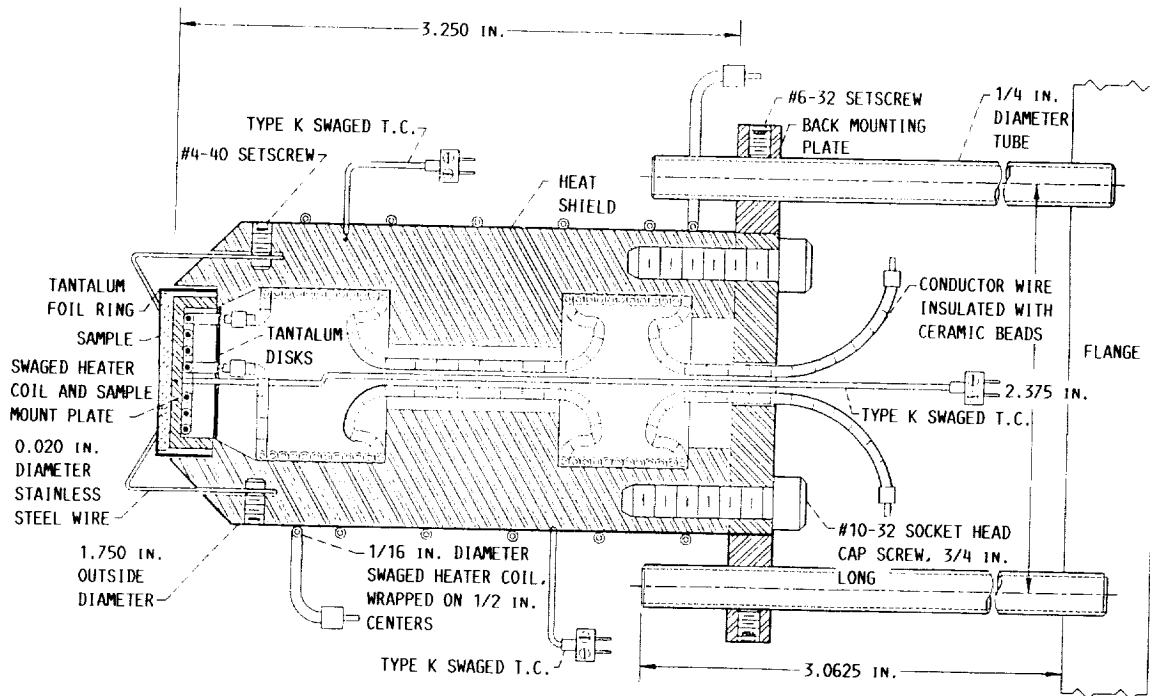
CUTAWAY DRAWING OF THE CVE HEATER/HOLDER.
